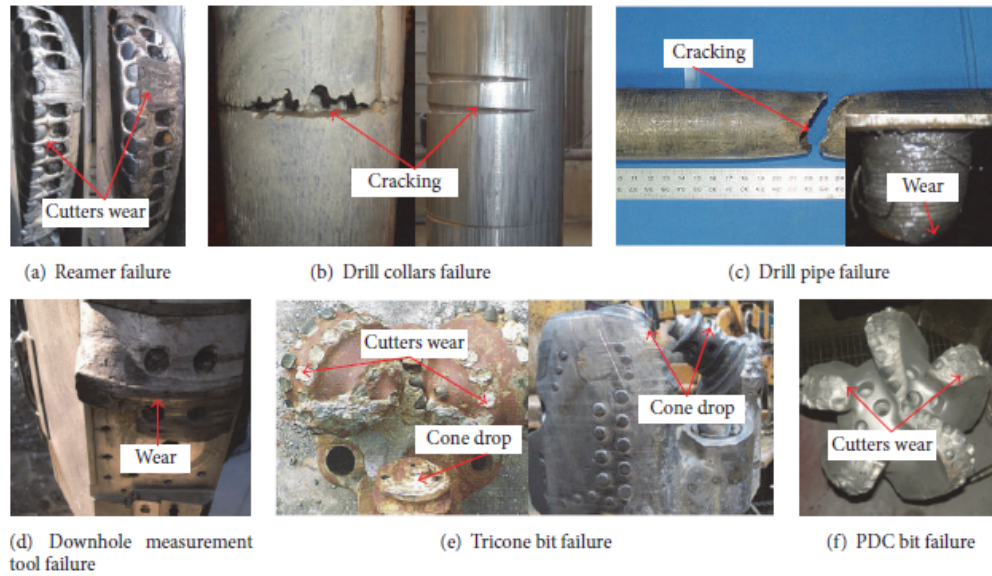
Typical drilling failures due to the different drill string vibrations [3].
